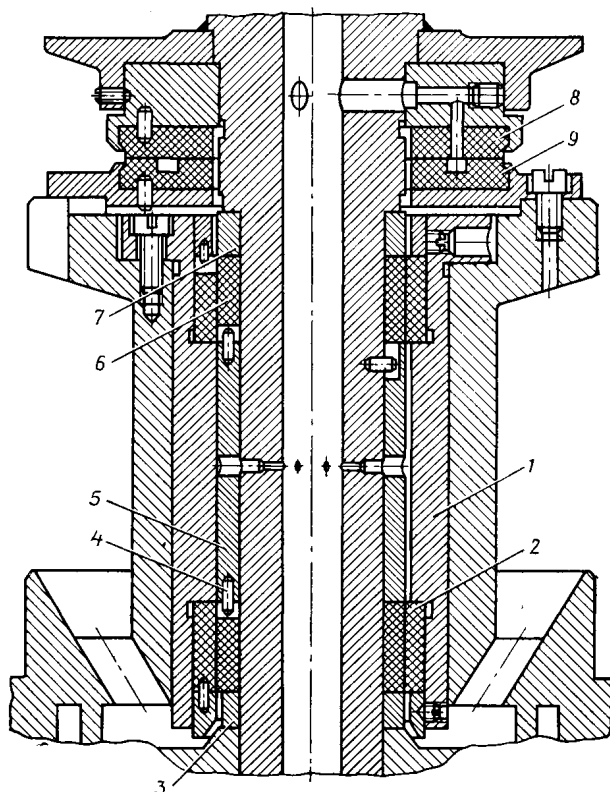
Lower bearing unit of a vertical pump with the sliding components made of ceramic material ИМ-332
